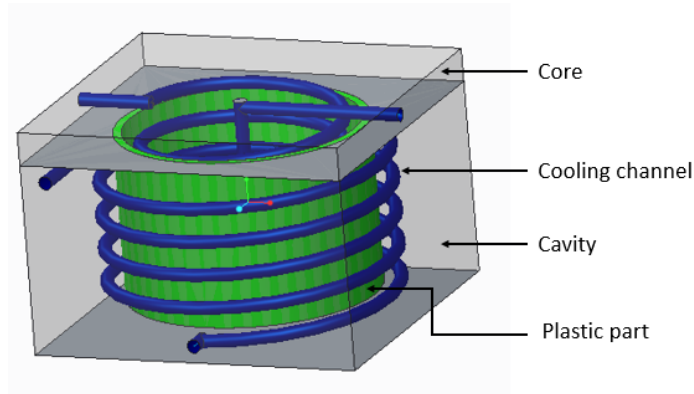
CAD model of a generic injection mold with core, part and cavity.
